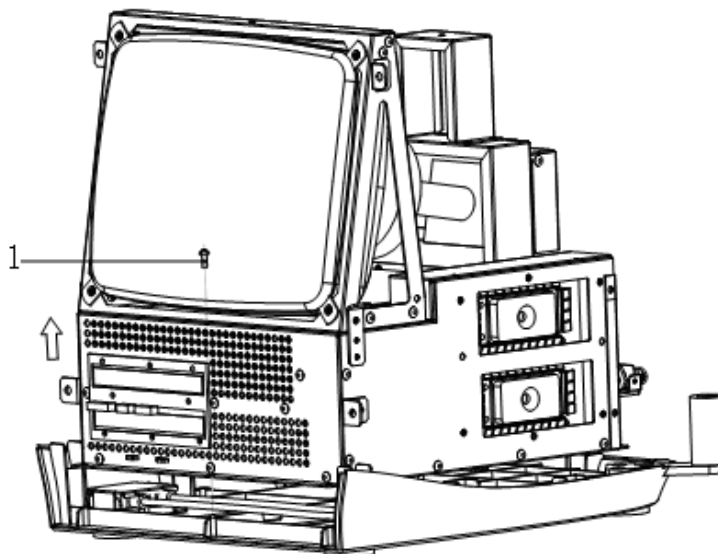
Sketch Map of Main Unit Box Disassembly
